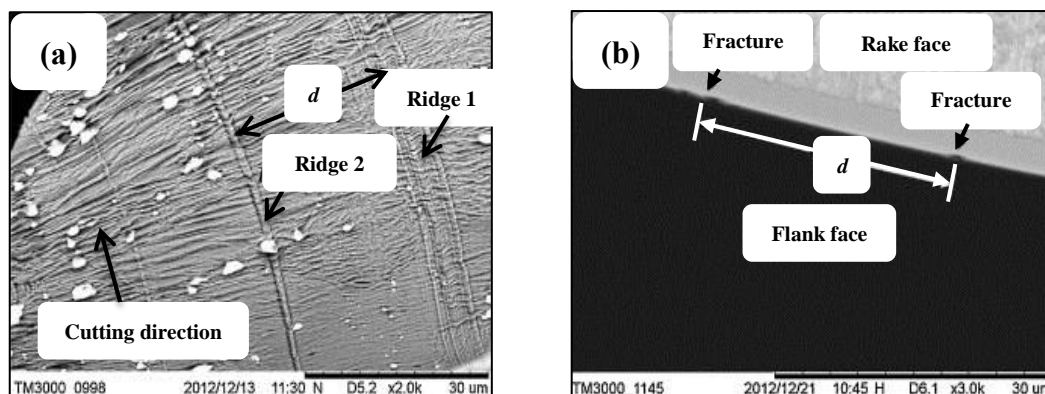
Ridges imprinted on (a) the chip surface by (b) the fracture wear of cutting edge (Zhang et al. 2014).
